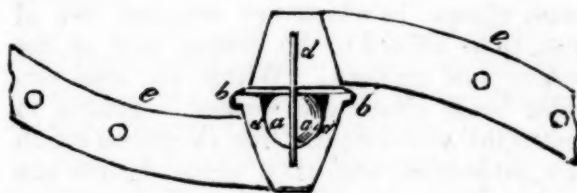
is a section of a brass cup or joint, in which is formed a hemispherical socket, in working order. The following is a description of its parts, viz:—*a a*, a spherical bearing, in the centre of which is a groove for oil; *b b*, the recess, which contains a
